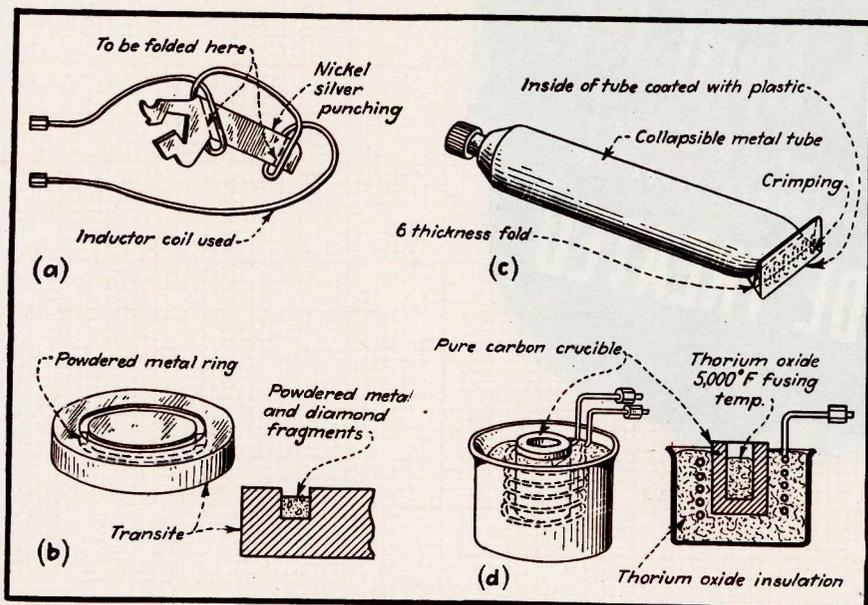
Shape of coil used to heat two spots on a metal strap for later bending. (a) Powdered metal and embedded diamond chips for a grinding wheel are shown at (b). At (c) is a collapsible metal tube ready for sealing by induction heating. An arrangement for fusing thorium oxide in a carbon crucible is shown at (d)
